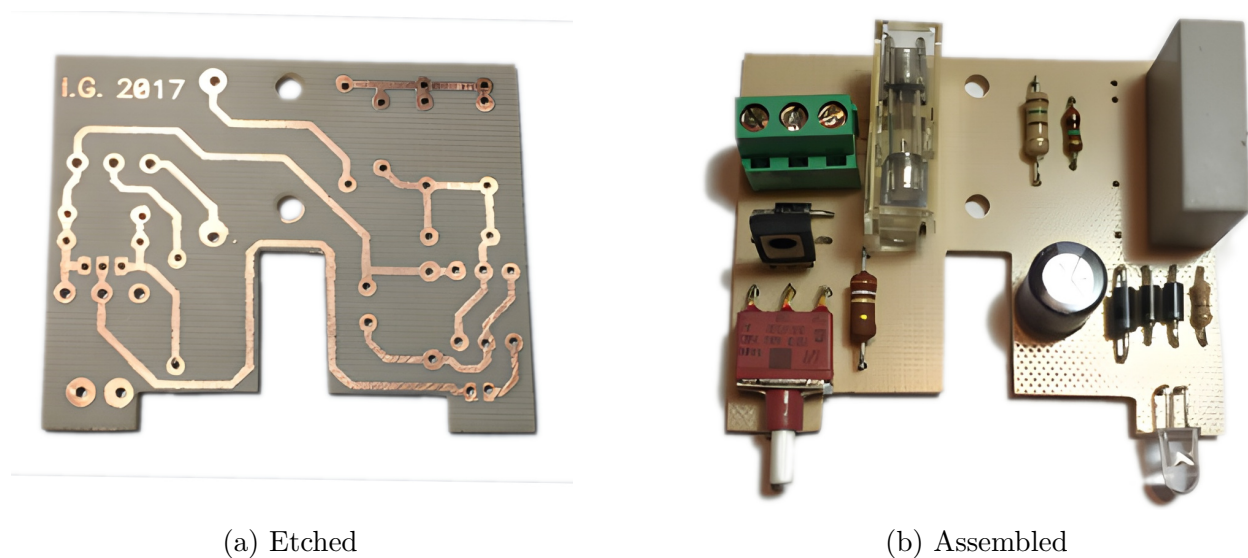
Printed Circuit Boards (PCBs) before and after assembly [17]. Processes for manufacturing PCBs use board layouts, like the one in fig. 1.2b, to specify where copper should remain on the final product. Traces on the PCB, visible in subfig. (a), are electrical connections that correspond to wires in the circuit diagram. When populated with components, as in subfig. (b), the device is complete.
